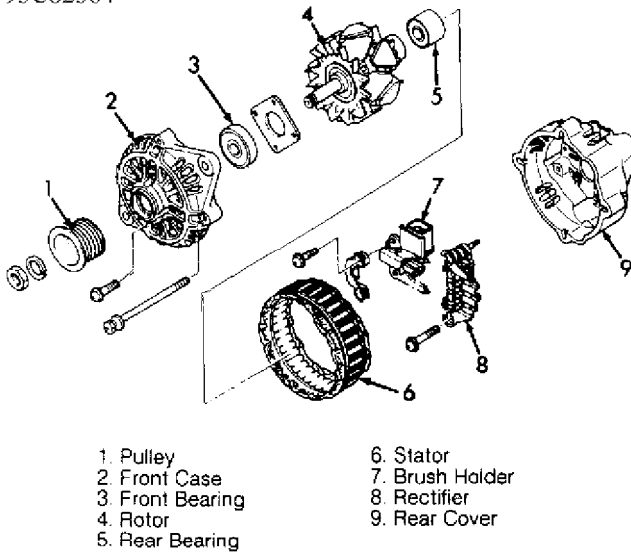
Exploded View Of Alternator (MX-3 V6, MX-6 V6, RX7 & 626 V6)
